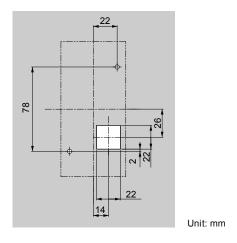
Panel Cut-Out Dimensions (External/Face-Mount Installation)
